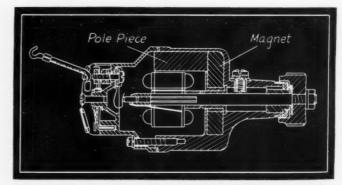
Diagram of magneto showing field parts in die cast housing. Pole piece is soft rolled steel
